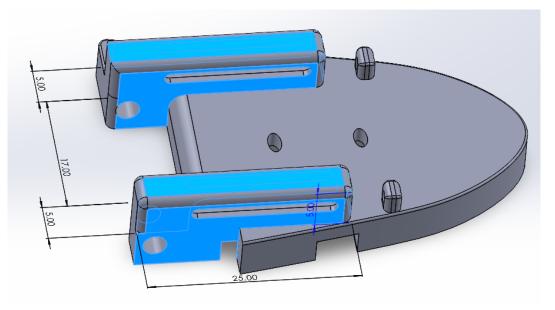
Slider Spring Cover Dimensions of Final Base. *The above figure shows the dimensions of the slider spring cover of the final base.
